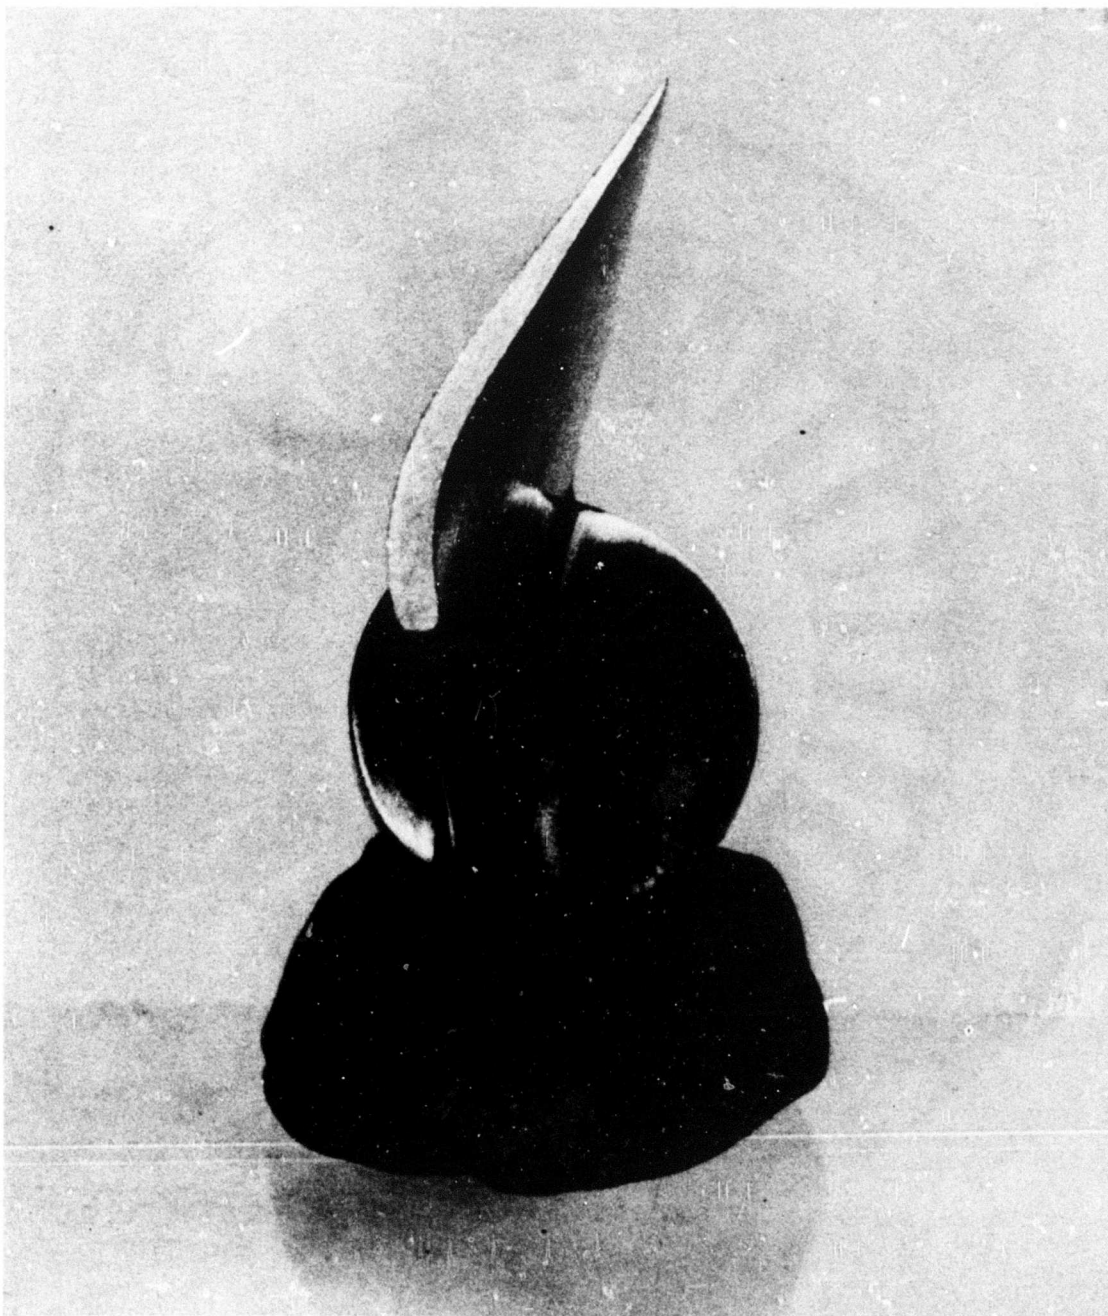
Developed Airfoil Inlet Guide Vane - Top View
